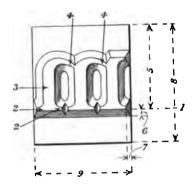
Isometric view of type as usually cast before and after breaking off the tang.
